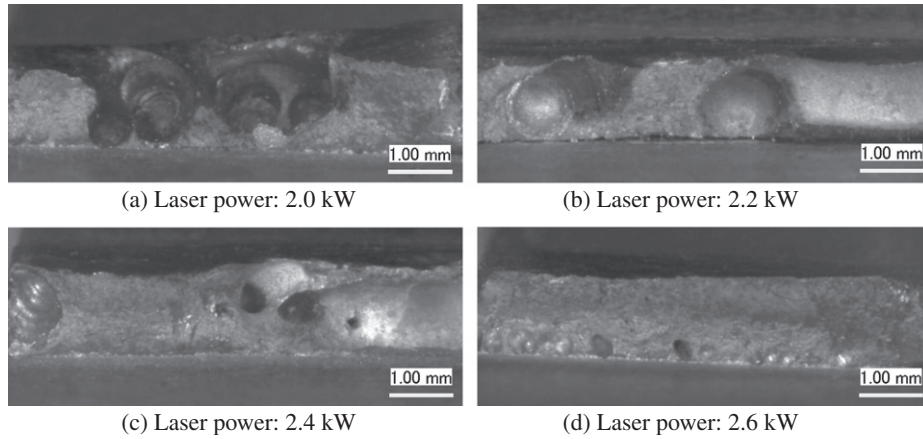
Micrographs of fracture section of weld of lap-jointed galvanized DP980 coupons under different laser powers (welding speed is set at 10 mm/s).
